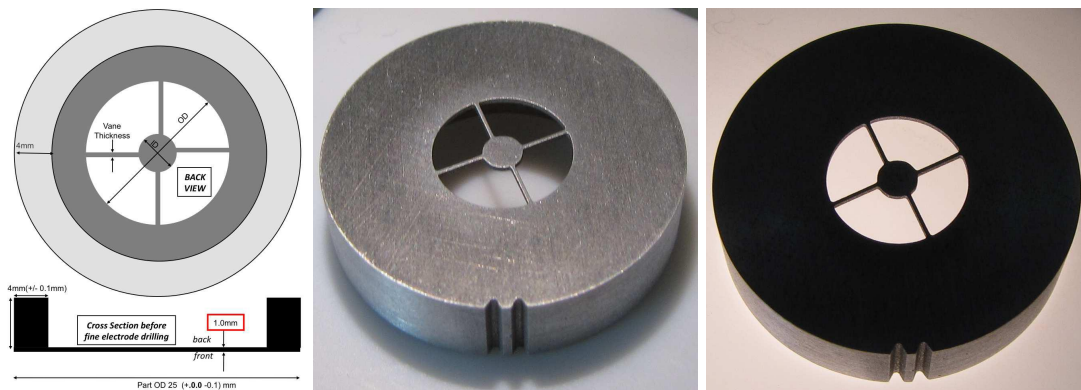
An aluminum carbon electrode drilled Lyot stop. *Left:* A sketch of the basic design. *Middle:* A manufactured Lyot stop prior to coating with the proprietary Epner Laser Black coating. *Right:* A coated part. Both faces are coated. The ‘cupped’ face faces the incoming beam. The Lyot stops will reside in the dewar of the IFS.
